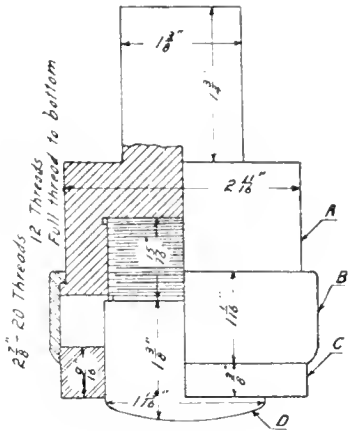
A. DIE FOR FORGING SOCKET PLUGS.
